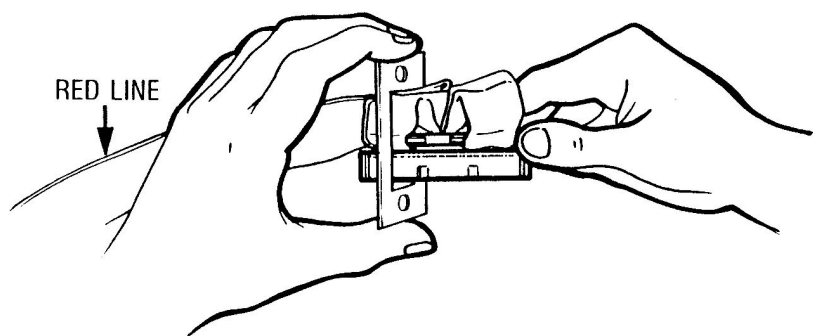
Fold connector and insert through backplate; attach backplate to cable clamp, but do not tighten screws
